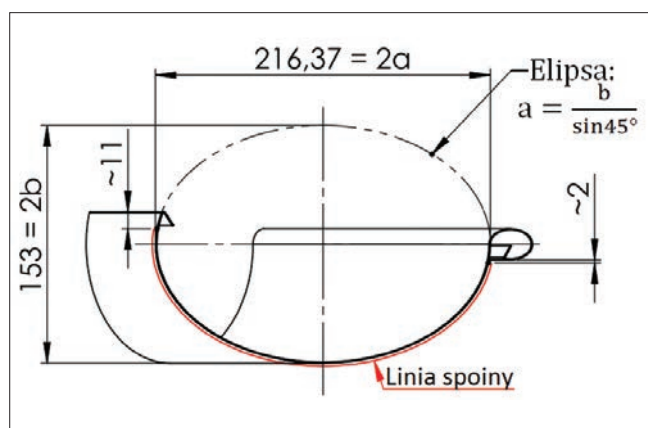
The course of the weld bead against the background of the cross-section of the welded profile
